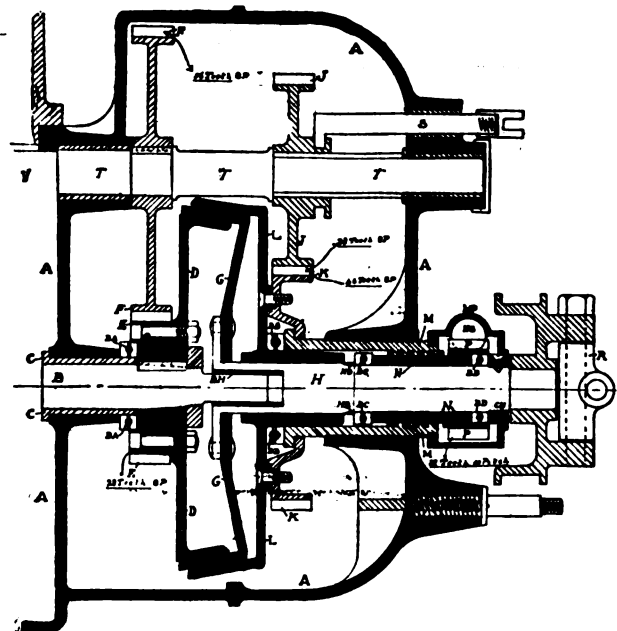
Sectional View of Newmobile Combined Clutch and Change Speed Gear.
